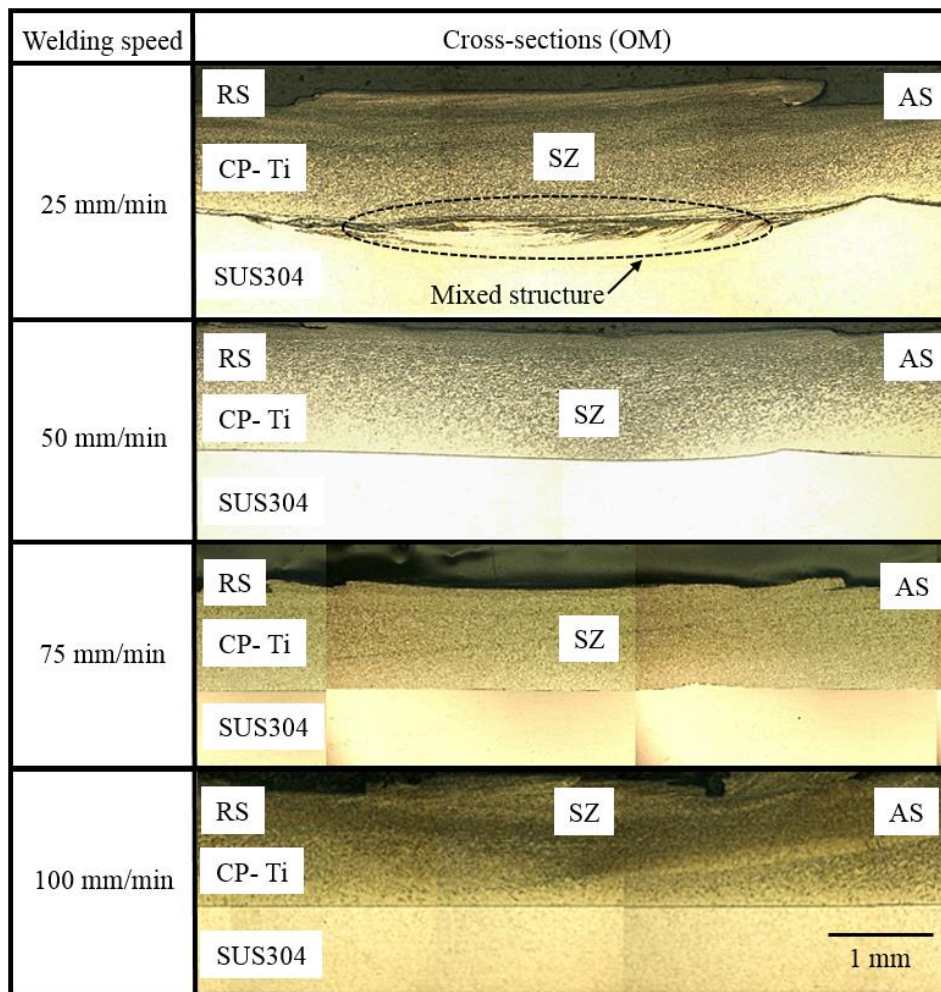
Cross-sections and interfaces of the CP-Ti/SUS304 dissimilar joints with different welding speeds of 25, 50, 75 and 100 mm/min at constant welding parameters of 250 rpm and load 9.8 kN.
